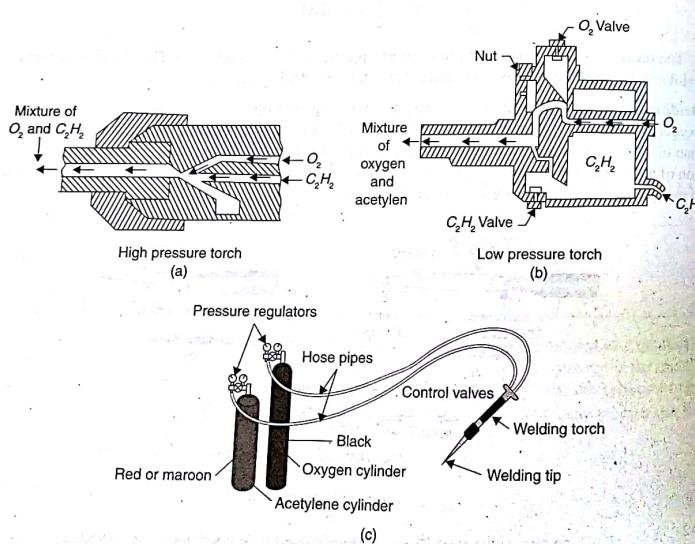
(a) Cross-sectional View of High Pressure Torch, (b) Cross-sectional View of the Low Pressure Torch, and (c) Basic Equipment Used in Oxyacetylene-gas Welding
